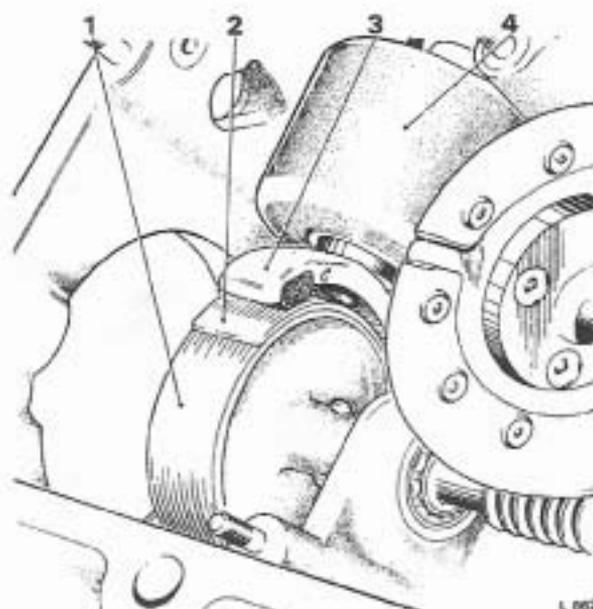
SETTING THE SOLENOID BRAKE (EARLY CARS)
